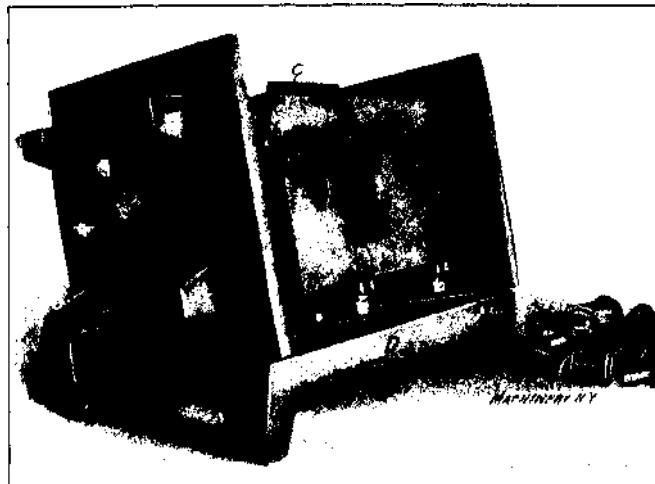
Jig in Fig. 24 in Position for Drilling Holes at an Oblique Angle with Jig Base
